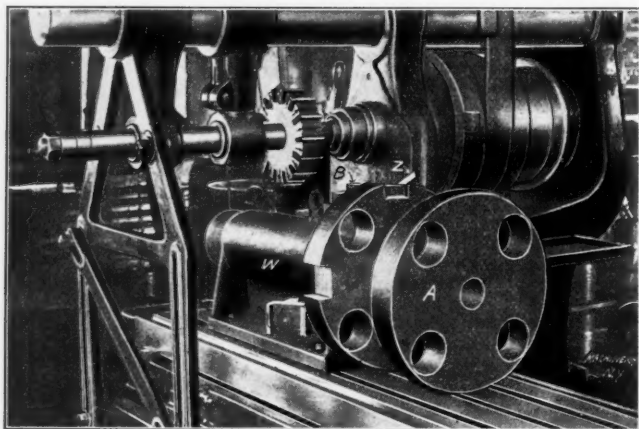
Testing the Accuracy of the Slots in the Indexing Blocks, using a Test Block fastened to the Fixture.
